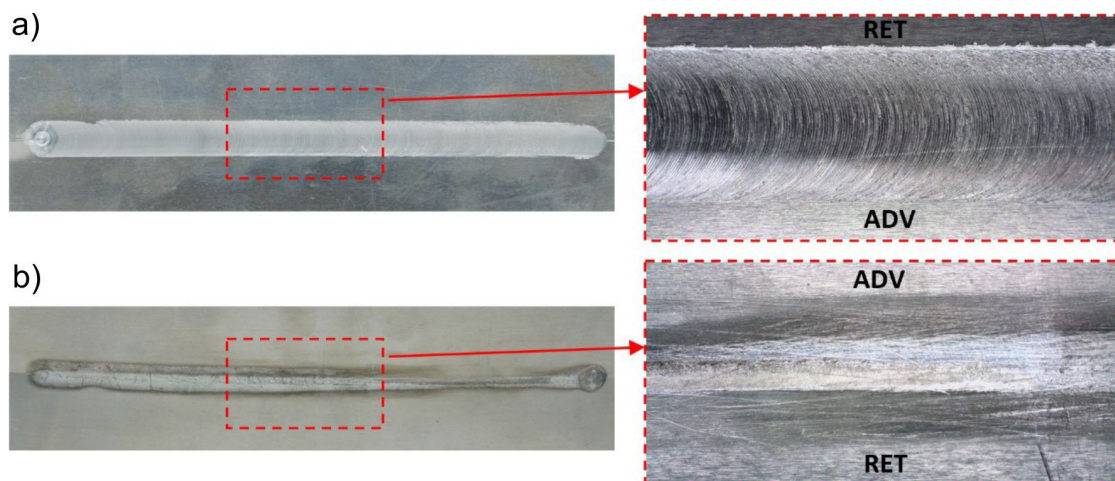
General view and close-up images showing surface quality of welds performed by a ceramic tool at 1000 rpm and 200 mm/min; a) face side; b) ridge side (ADV-advancing side, RET-retreating side)
